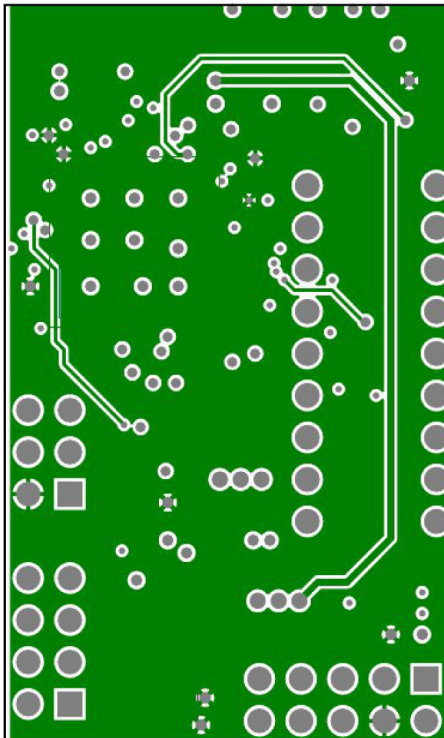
PC Interface Board; Middle Layer 2, Top View (as if PCB was Transparent)
